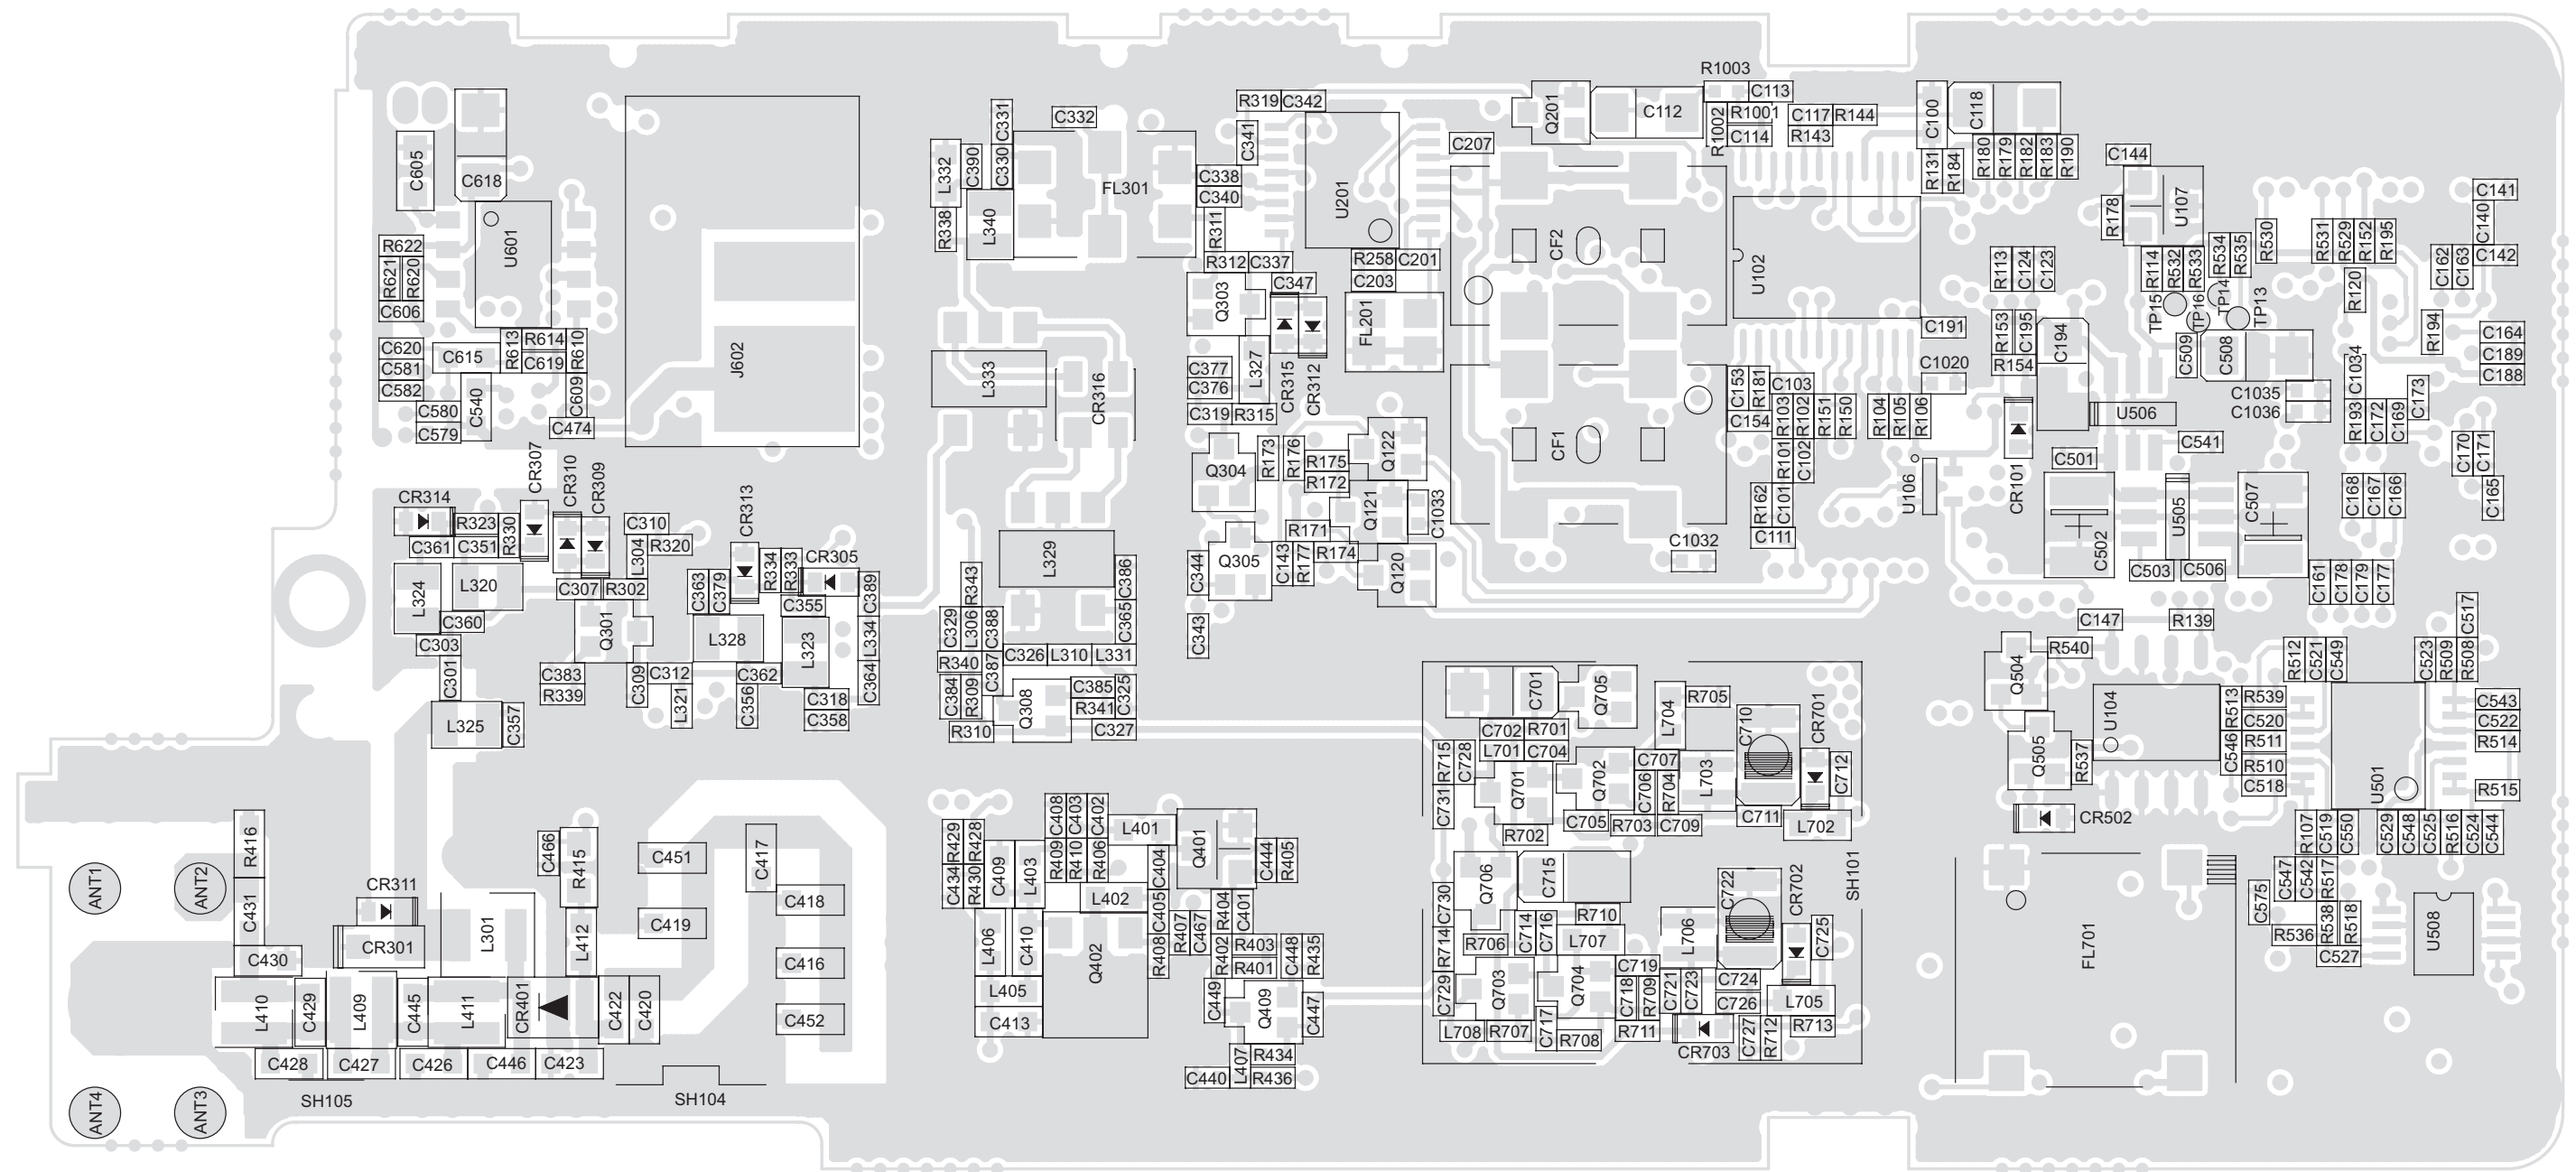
UHF2 R&TTE (435–470 MHz) Mainboard Bottom Side: PCB No. E11-0763-0
